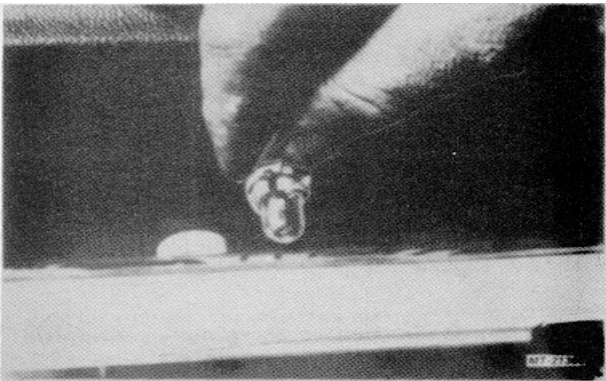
Removing Bulb and Bulb Socket from Cluster
